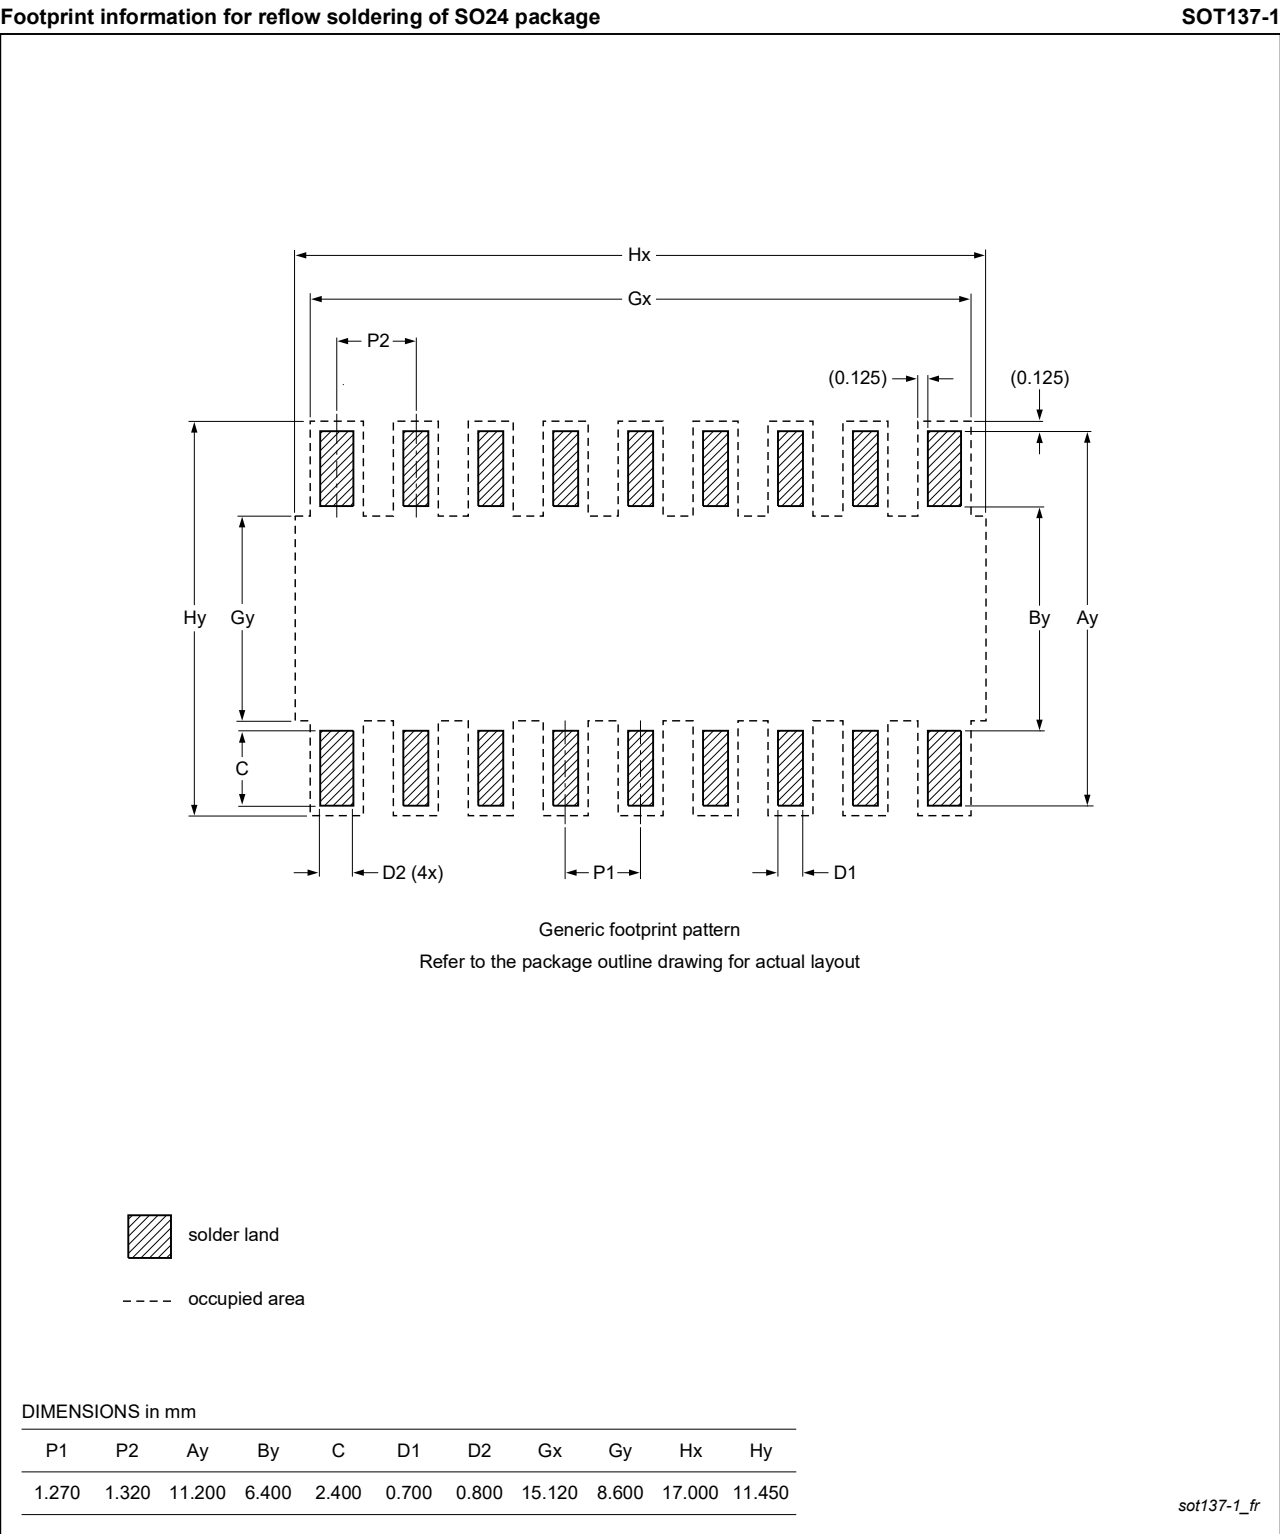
PCB footprint for SOT137-1 (SO24); reflow soldering
